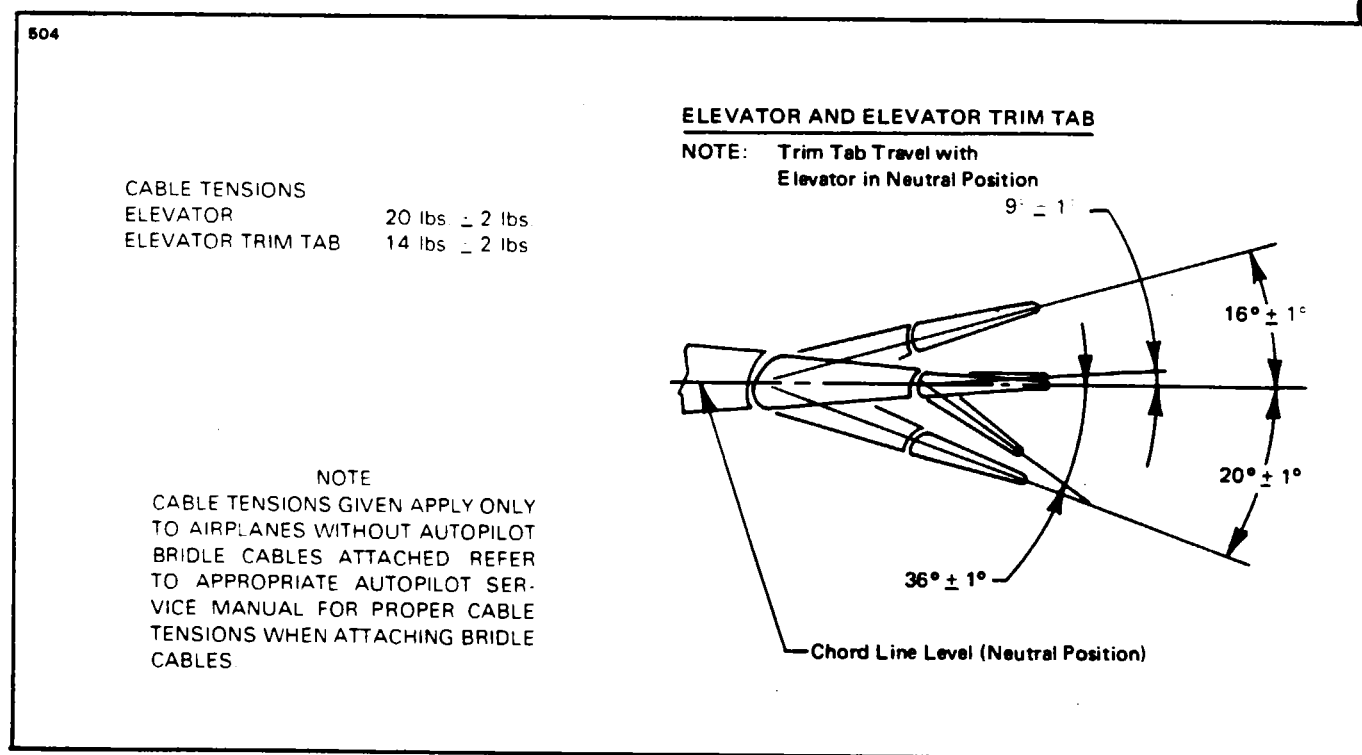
Elevator and Elevator Trim - Travels and Cable Tensions
